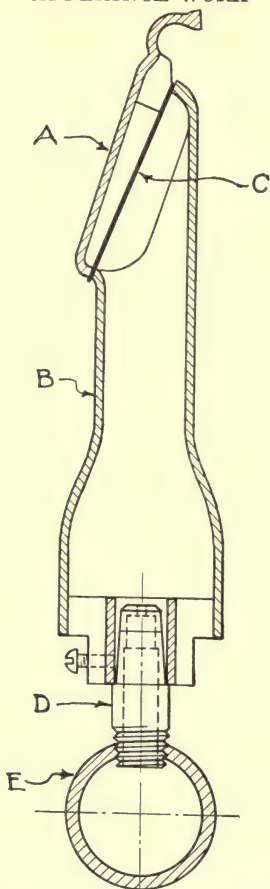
Sectional View of Burner of Instantaneous Automatic Heater, page 741: A, Burner Cap; B, Mixer Tube; C, Gauze; D, Orifice Spud; E, Burner Ring.
